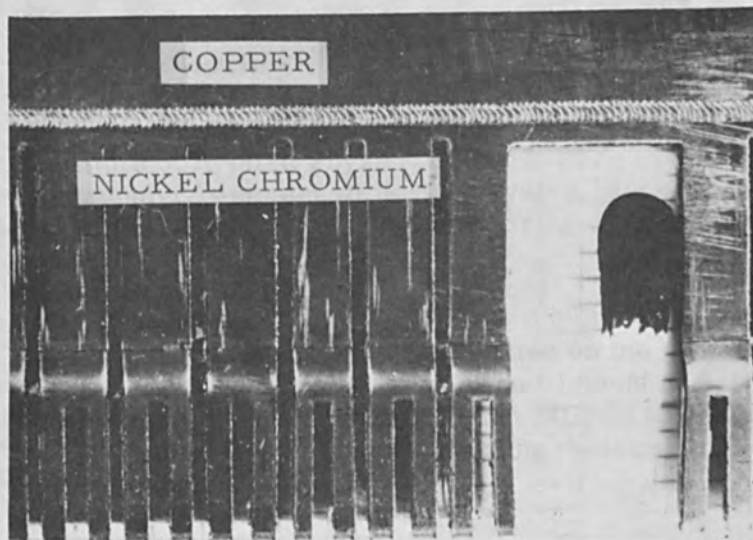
Electron beam seam weld made by oscillating the beam at 50 cycles per second perpendicular to the welding seam.
